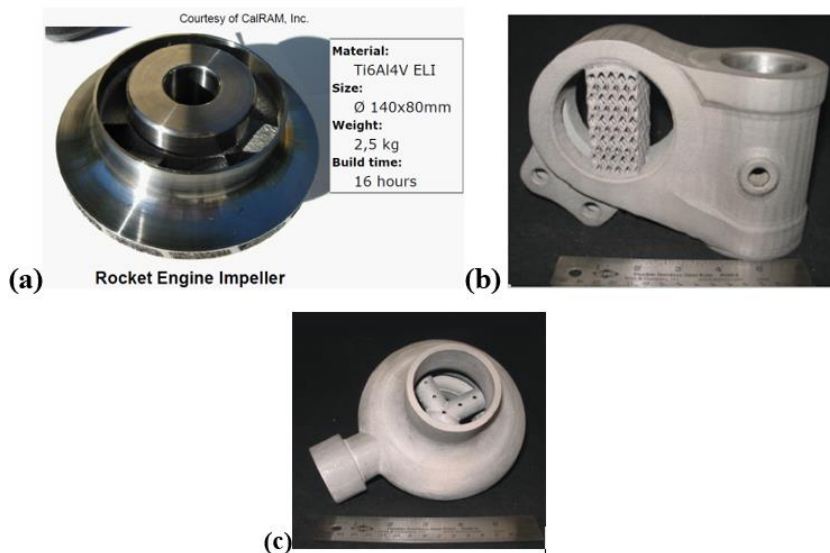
(a) A rocket engine impeller, (b) a landing gear hinge, (c) an early warning system mixing part produced by CalRAM Inc. [217].
